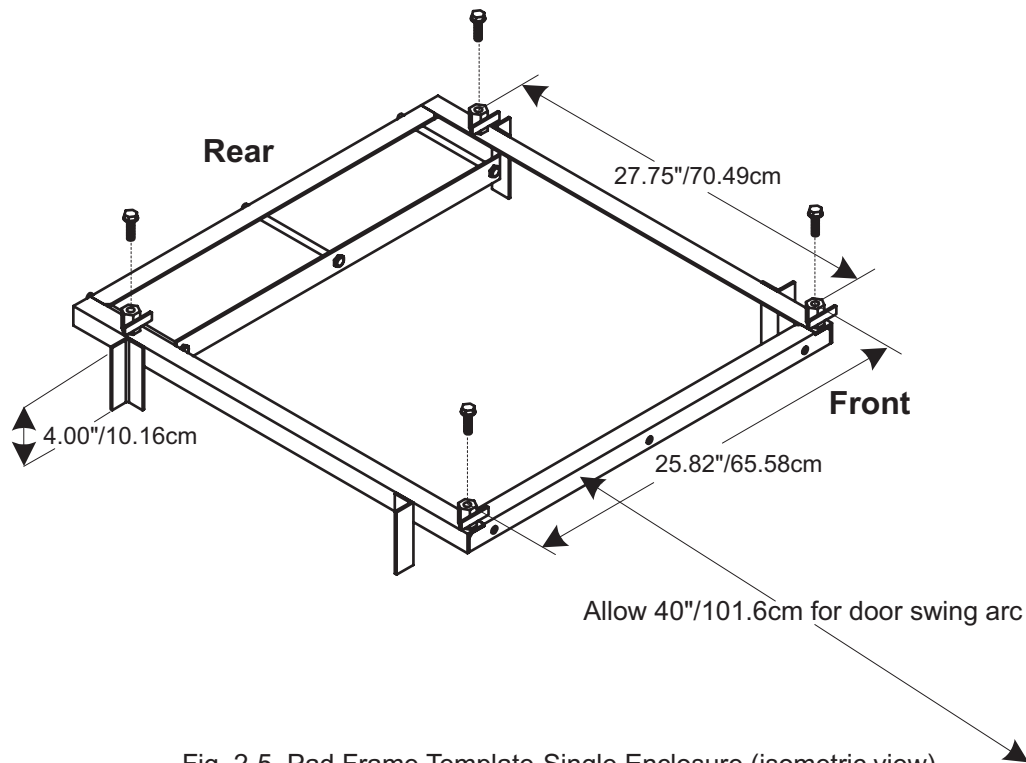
, Pad Frame Template-Single Enclosure (isometric view)
